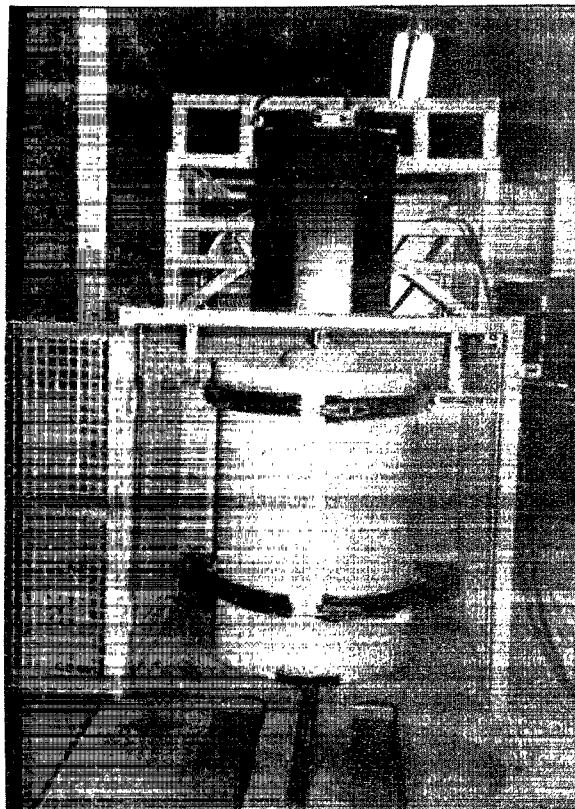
Welding Cover onto Receiver During Process Demonstration.
